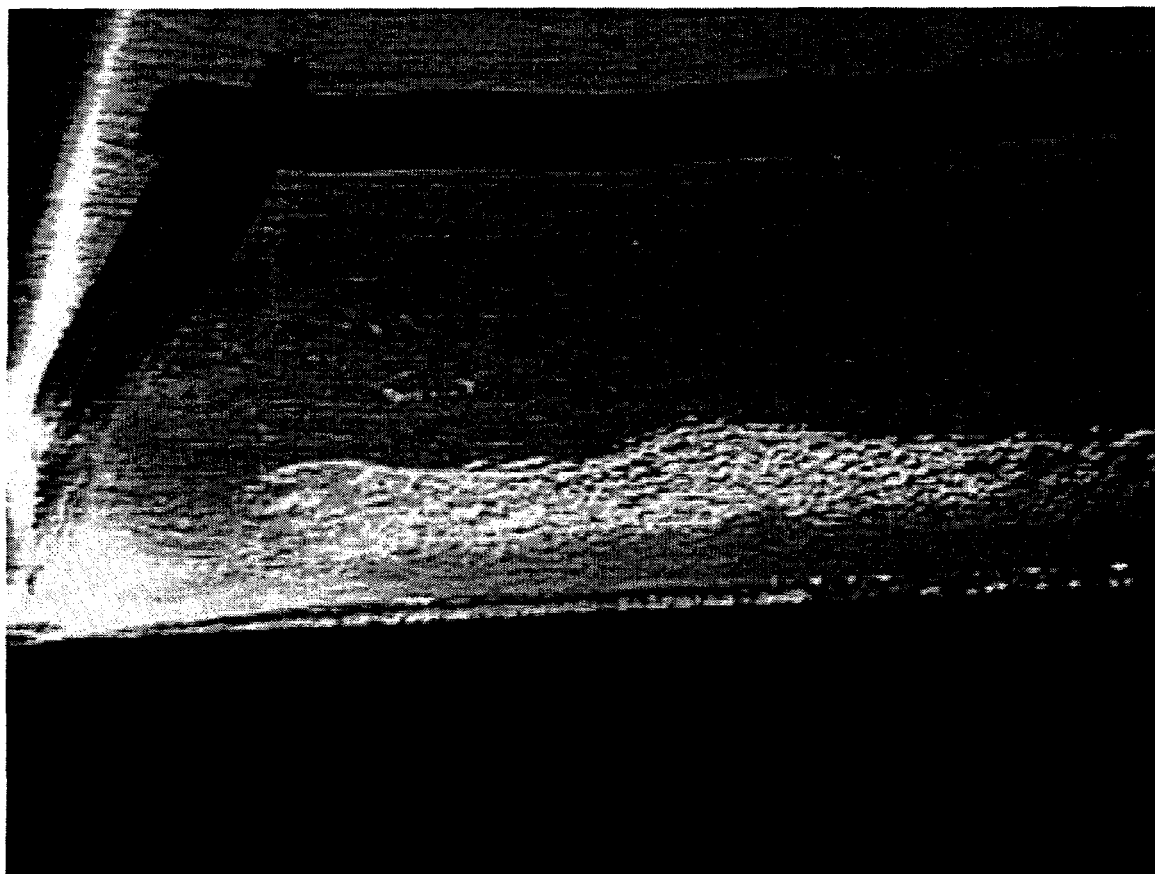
Close-up view of soldered area on casting shown in Figure 2.
